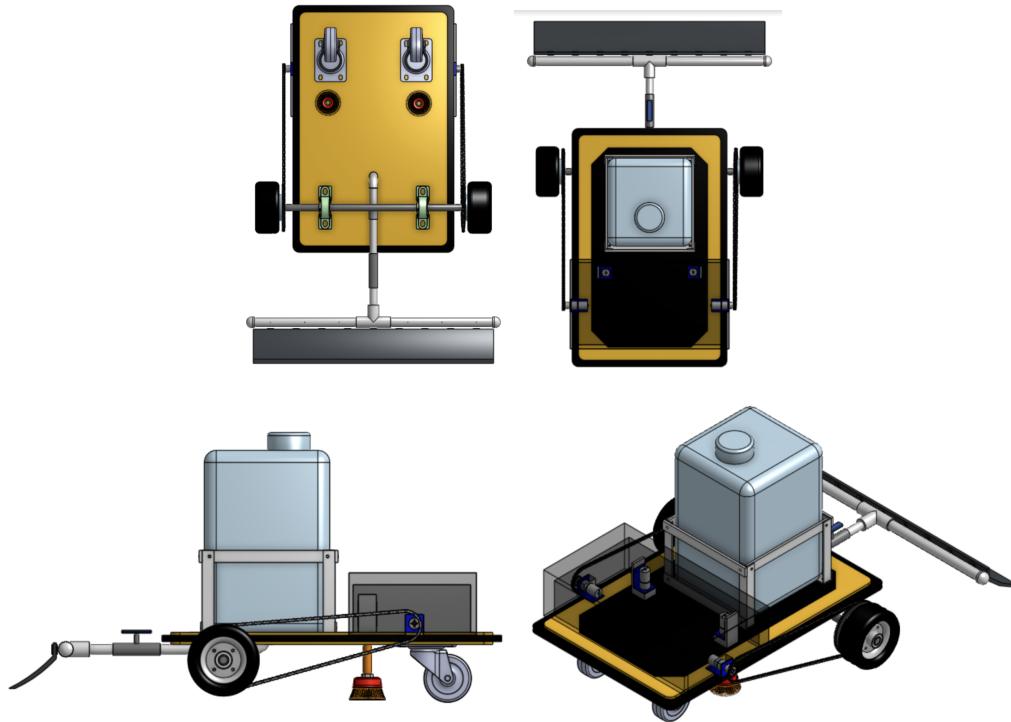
Mechanical Engineering team's CAD drawings of the Shazamboni.
